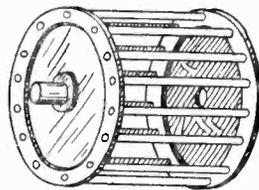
Typical rotor of an induction motor, made up of copper rods which are riveted and soldered at each end to circular copper discs mounted on the rotor shaft. Before assembly, laminated sheet steel discs having slots for the copper rods are placed on the shaft inside this "squirrel-cage"; this steel core serves to reduce the reluctance of the path for the rotating magnetic flux and for the fluxes set up by the many shorted loops in the rotor.
